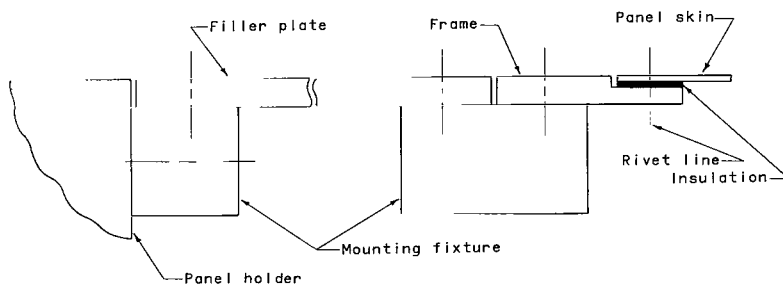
Cross section of panel holder. All dimensions are in inches (cm).
